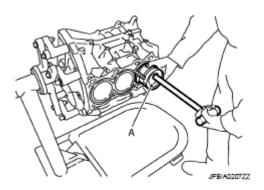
Installing Piston Using Piston Ring Compressor Courtesy of NISSAN MOTOR CO., U.S.A.
